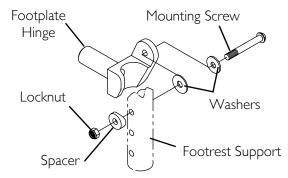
Installing Adjustable Angle Flip-up Footplate Hinge
